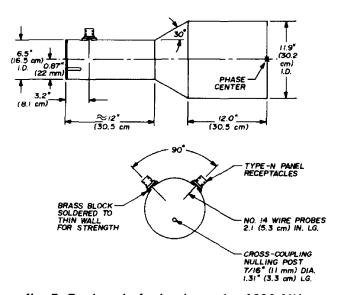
Dual-mode feed antenna for 1296 MHz. Material for the round sections is 1/32-inch (0.8-mm) brass, rolled and butt joint seamed. The conical section is soldered on with many small angle tabs. Probes are provided at right angles to facilitate circular polarization. Adjust probe lengths for best swr on 50-ohm feedline. The nulling post should be mounted in a radially slotted hole to permit radial adjustment of position for minimum cross coupling between probes.
